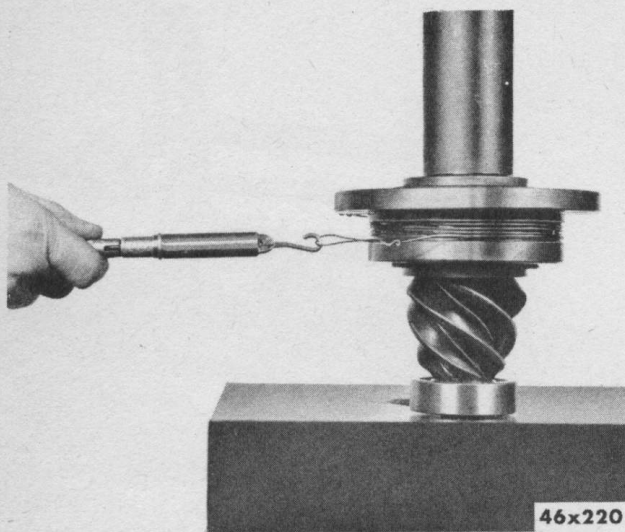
Checking Pinion Bearing Pre-Load With Inch-Pound Scale
